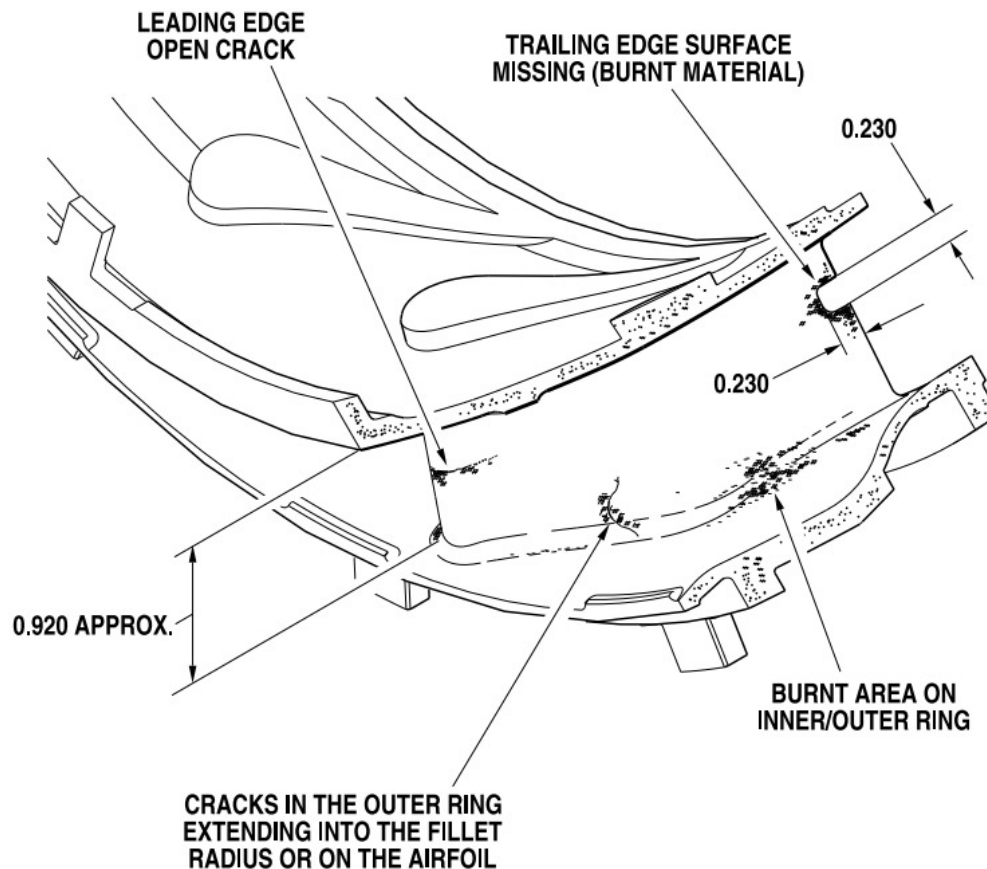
Borescope Inspection of Combustion Chamber Liner and Large Exit Duct (Task 72-00-00-280-804)
